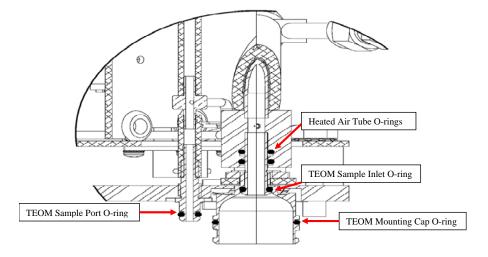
O-Ring Locations of the TEOM Mounting Assembly
